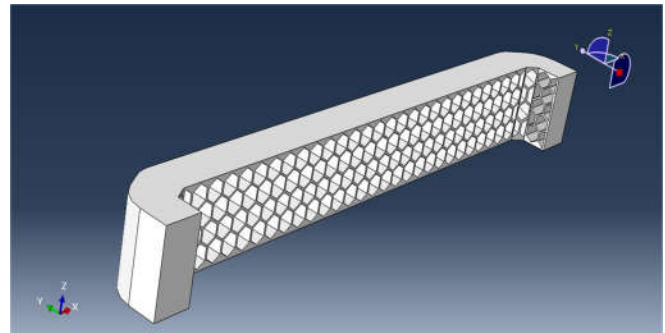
(b) Hexagonal honeycomb bumper for front and rear impact (rear view)
